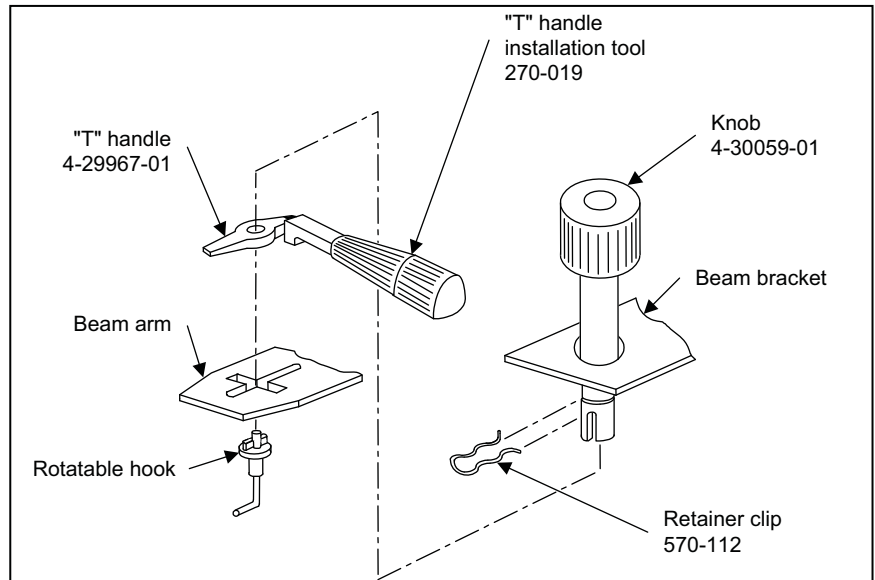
B100R Rotatable Beam and Hook Assemblies
